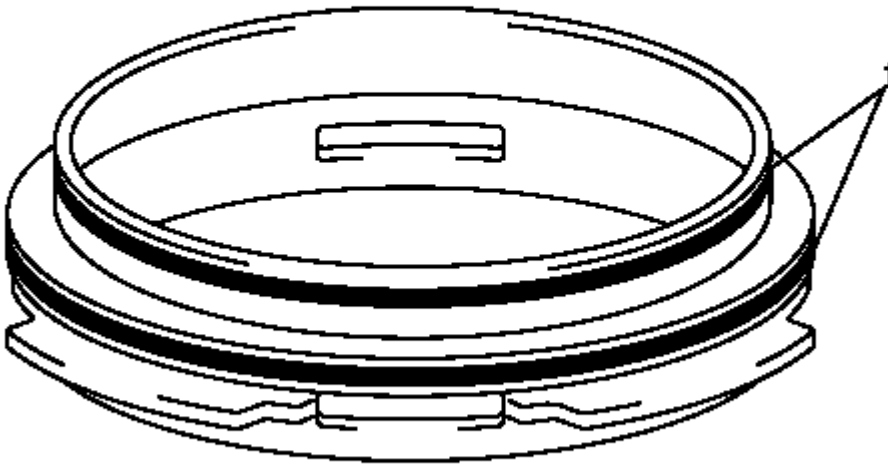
Coating 2 New O-Rings With Automatic Transaxle Fluid (ATF)
